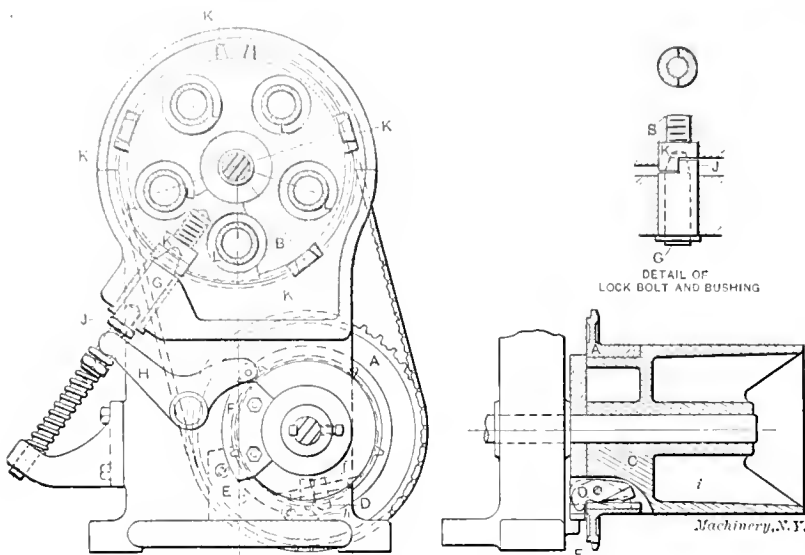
The Method of Indexing and Locking the Spindle Head.
